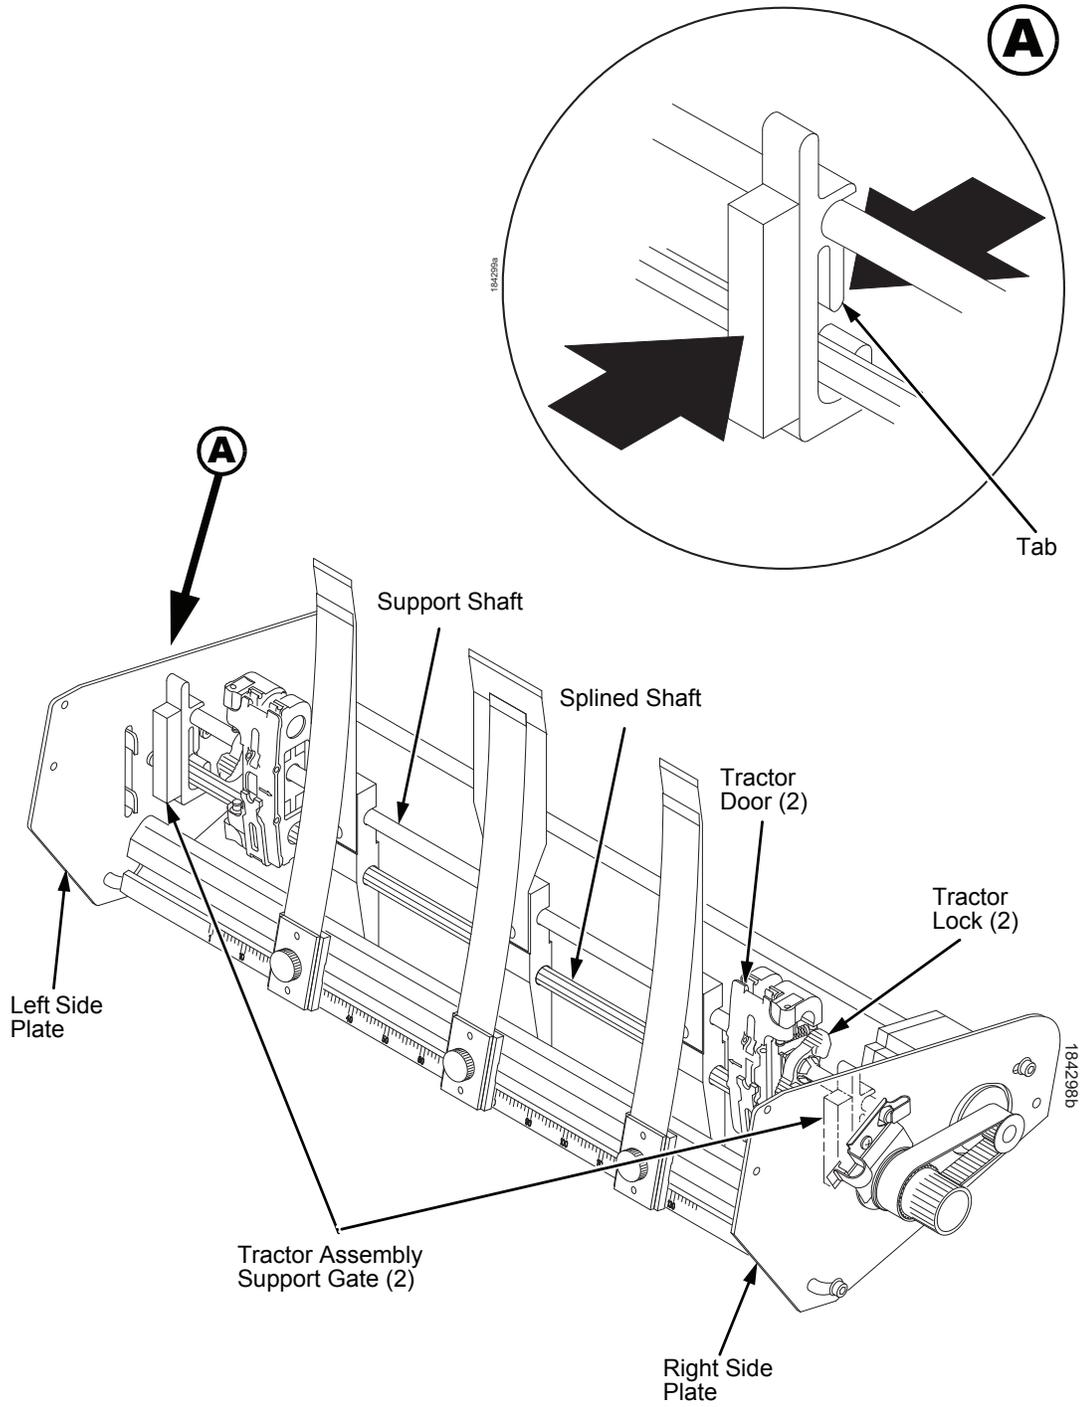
Removing and Installing the Tractor Assembly Support Gate
